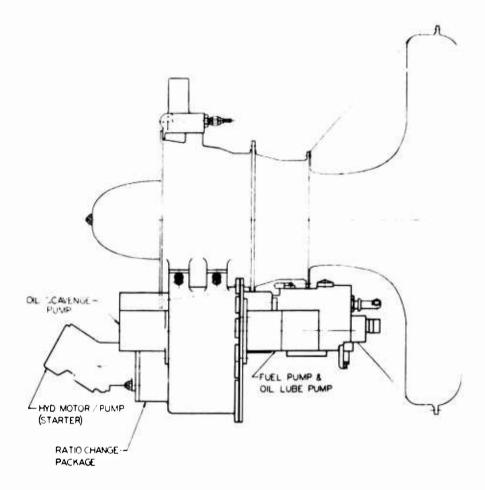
Engine Installation With Drop Gearbox, Bendix Control.
